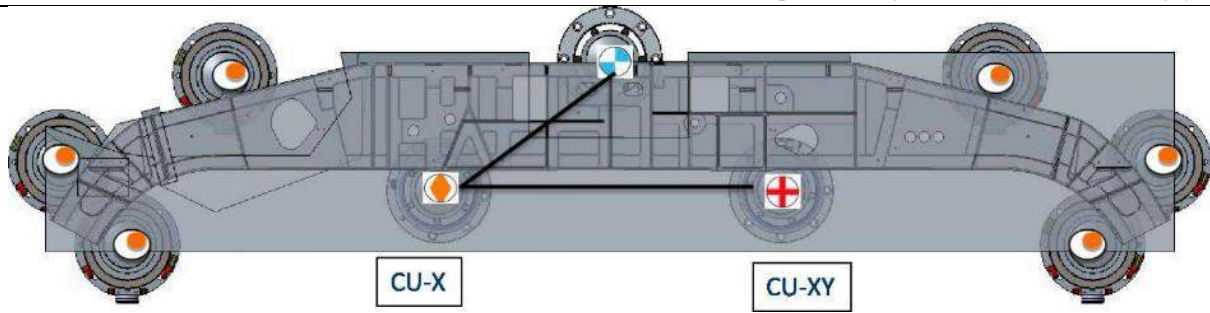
Developed method of mounting beam-type parts using 9 mounting modules.
